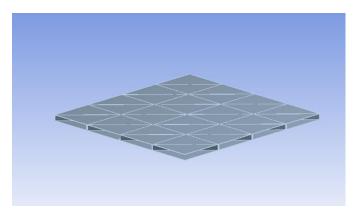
Stiffened sandwich plate having triangular stiffeners
